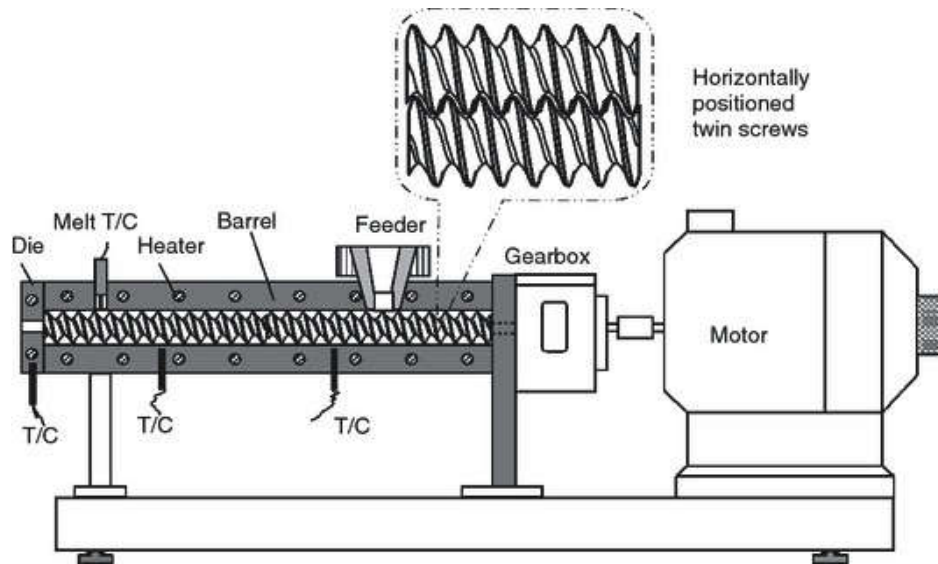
An assembly of twin screws and their arrangement in the extruder.
